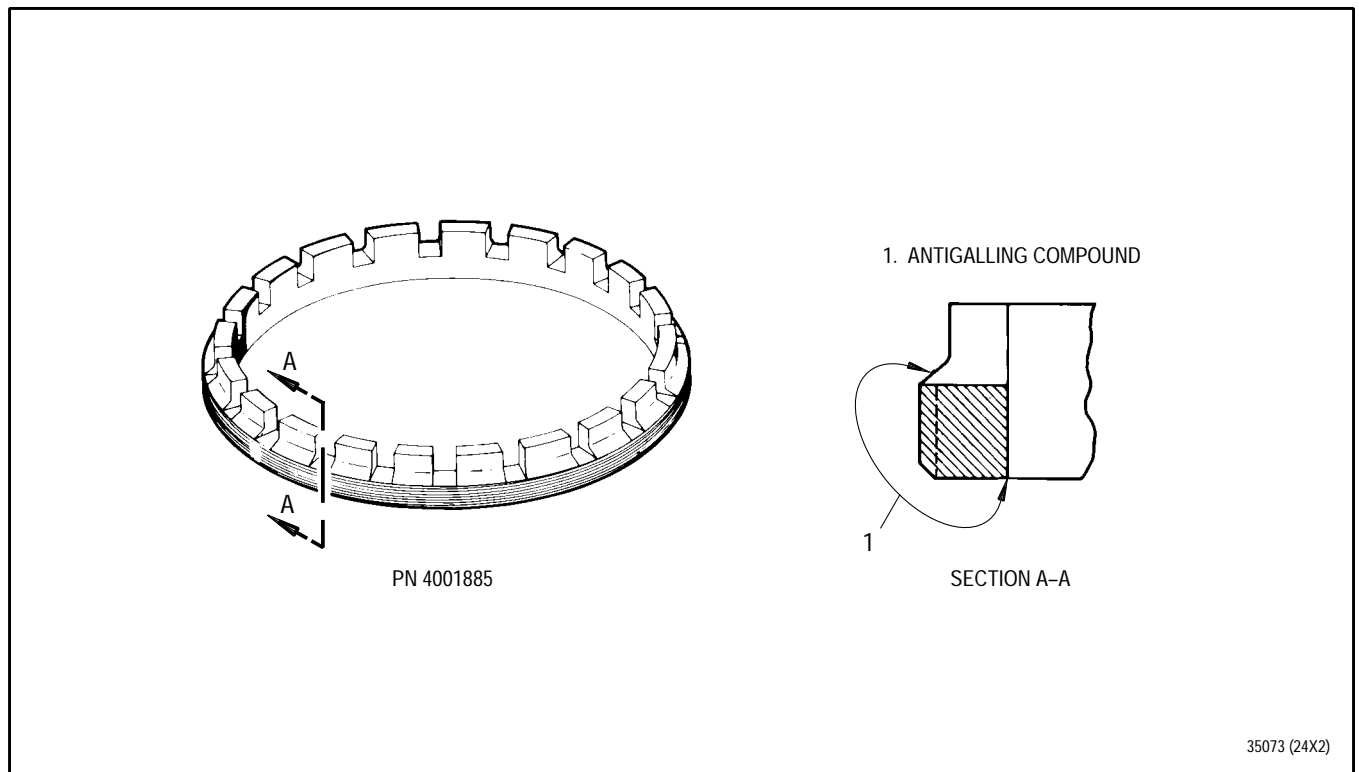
Bearing Retaining Nut (PN 4001885) - Inspection
